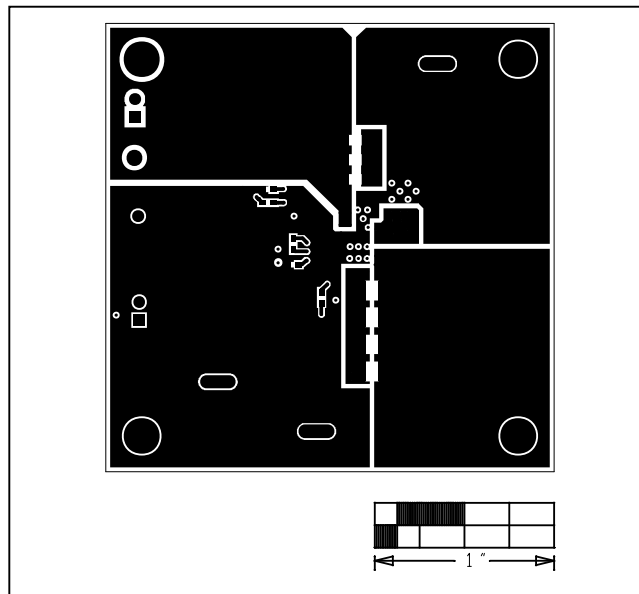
MAXM17544 EV Kit PCB Layout—Solder-Side
